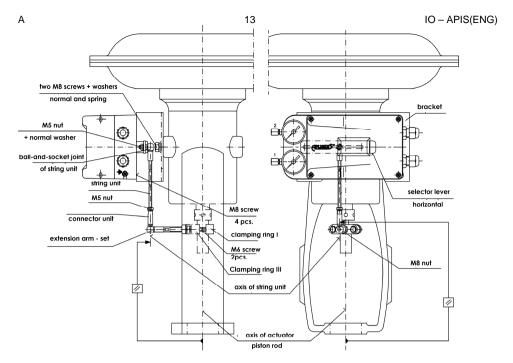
APIS-100-... positioner with APIS-A001 mounting set (positioner assembled on yoke actuator, type 37 or 38 manufactured by Polna S.A.)
